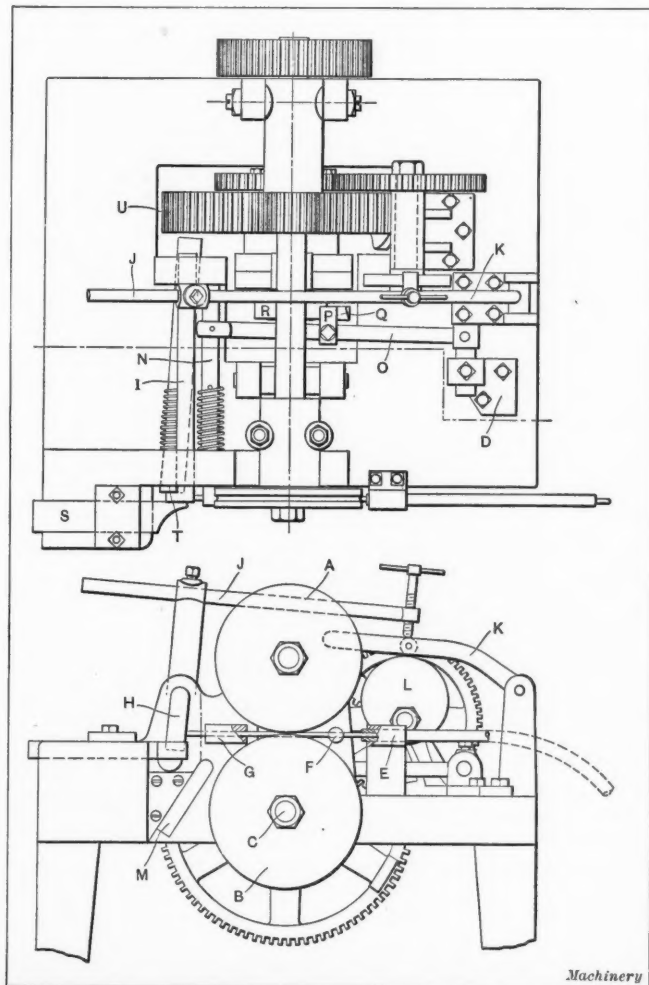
Spring Coiling Machine patented in 1898 by F. W. and A. G. Hoefler
